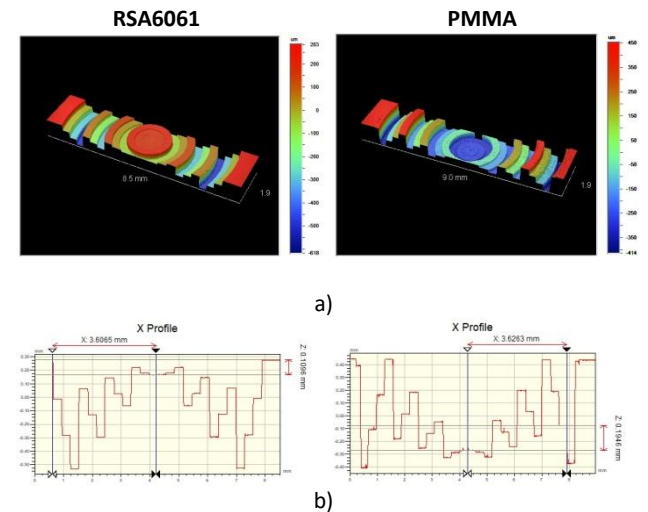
Images obtained by optical Profiler a) Three dimensional image of the machined Stepwise-phase Fresnel structures on different materials; and b) Cross-section profile of the machined samples with variable height.
